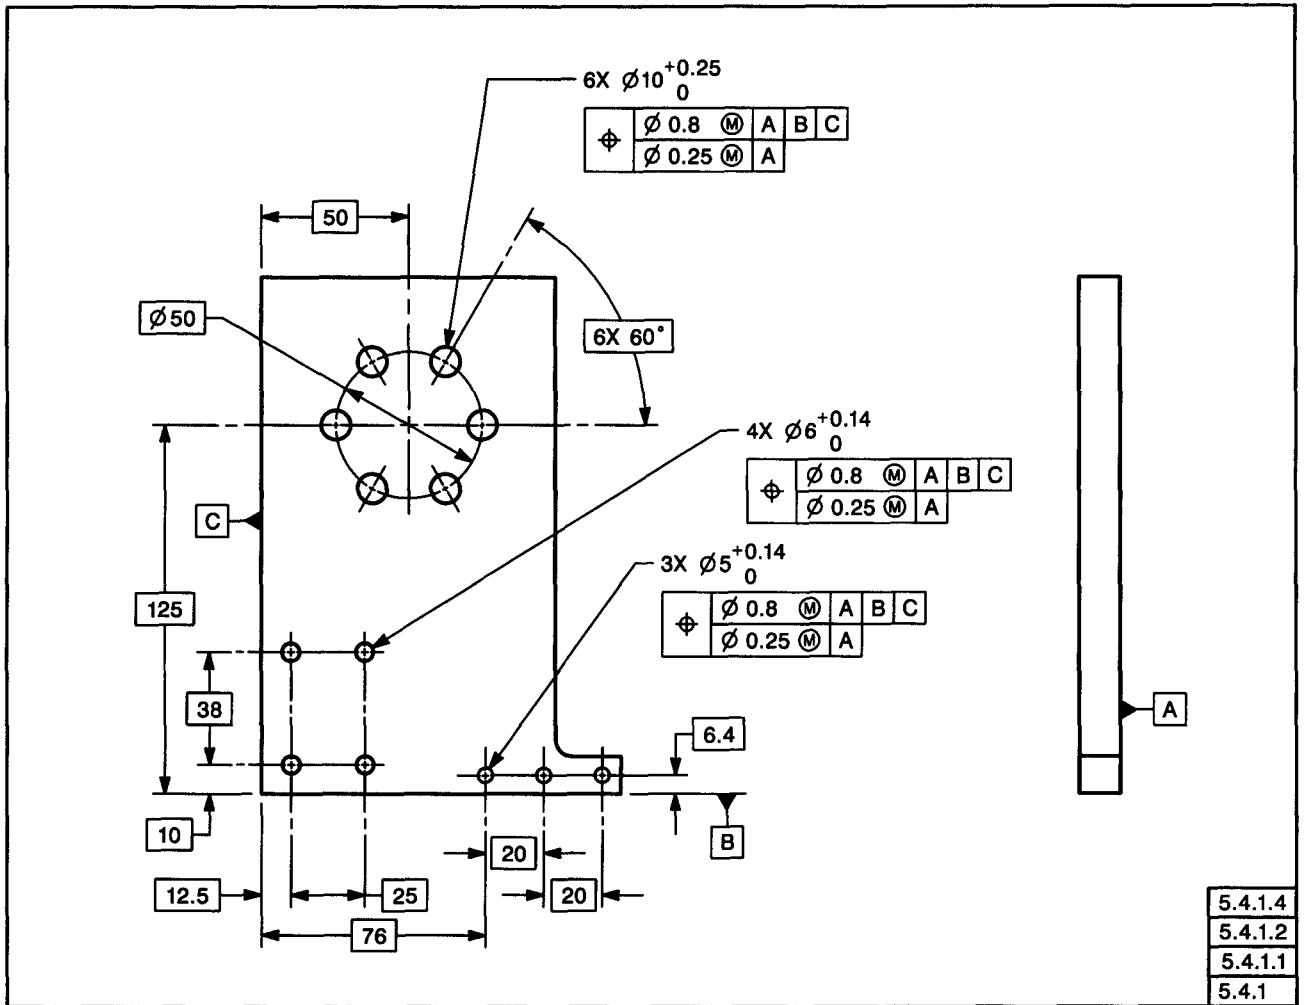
HOLE PATTERNS LOCATED BY COMPOSITE POSITIONAL TOLERANCING
